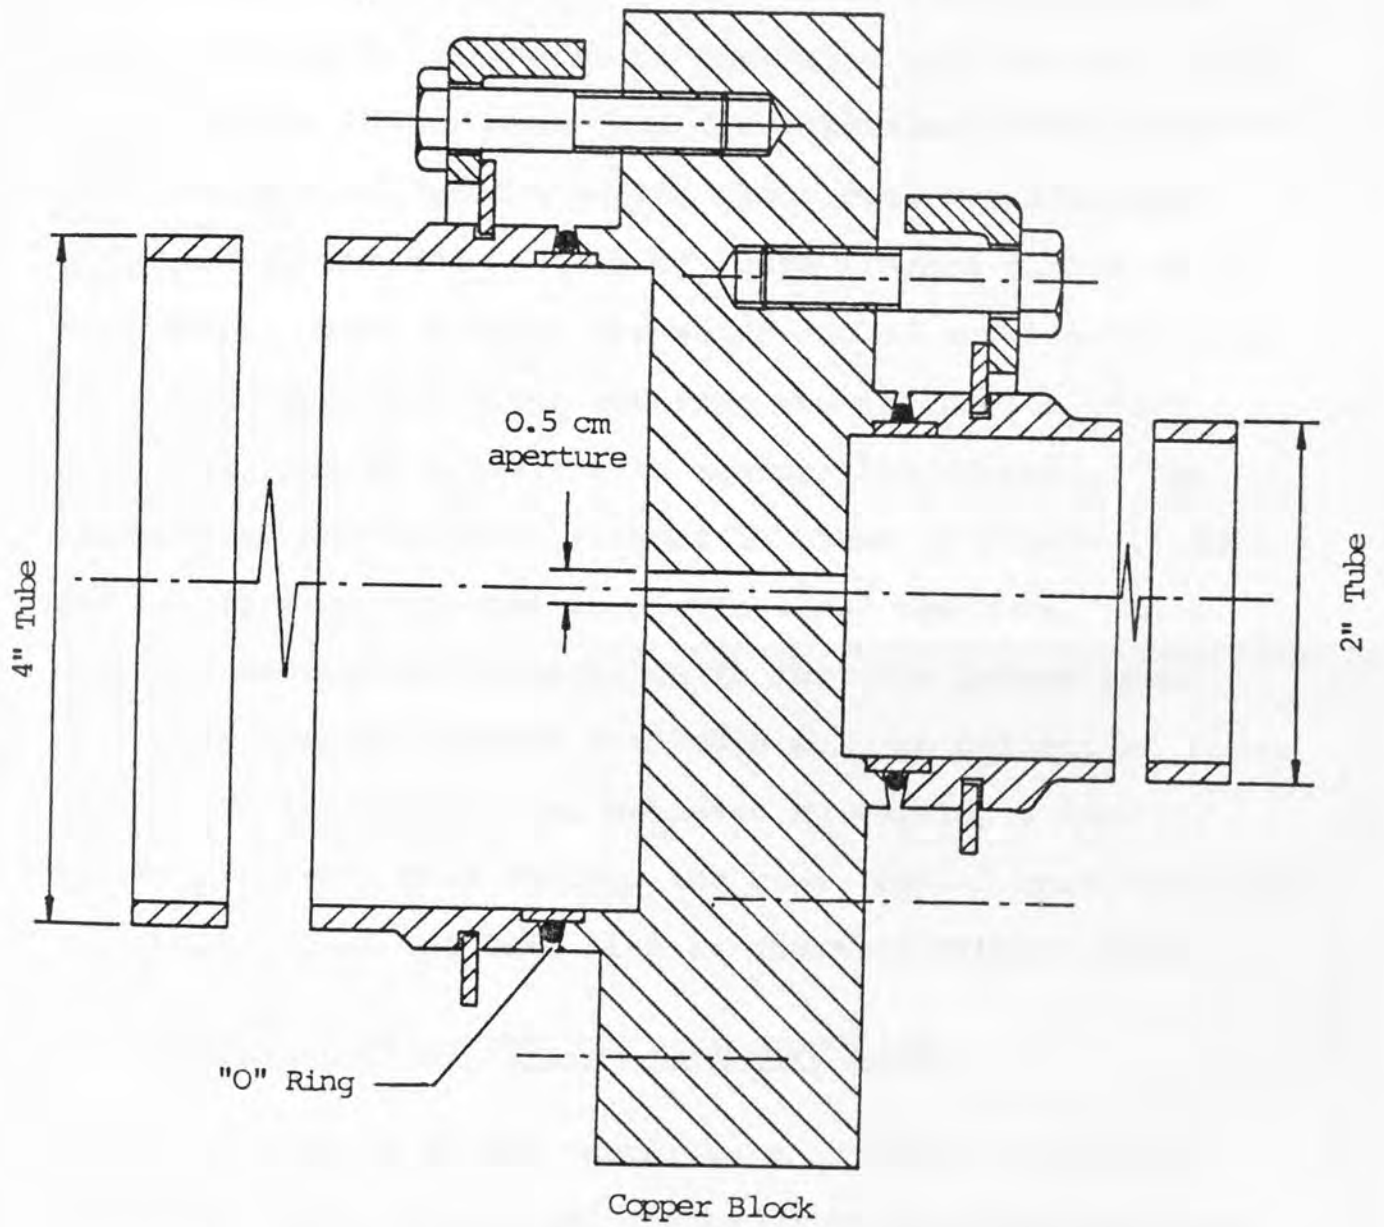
4" to 2" Reducer with aperture assembly.
